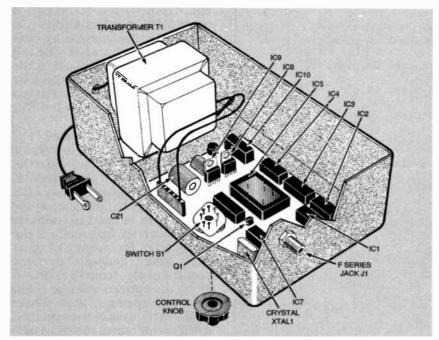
ASSEMBLY DIAGRAM of the completed Video Pattern Generator. The power supply is located within the project case. The switch knob is attached to the PC boardmounted switch on the bottom of the case.
